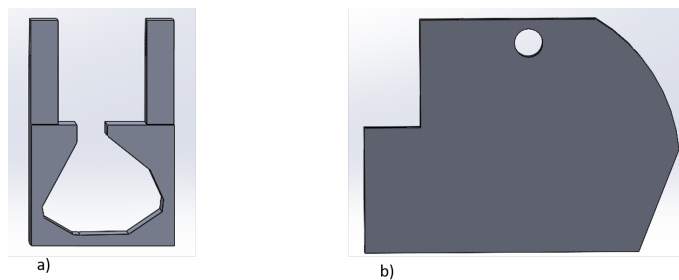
3D modeling of the support of the figure 3.11. a) Front view. b) Side view.
